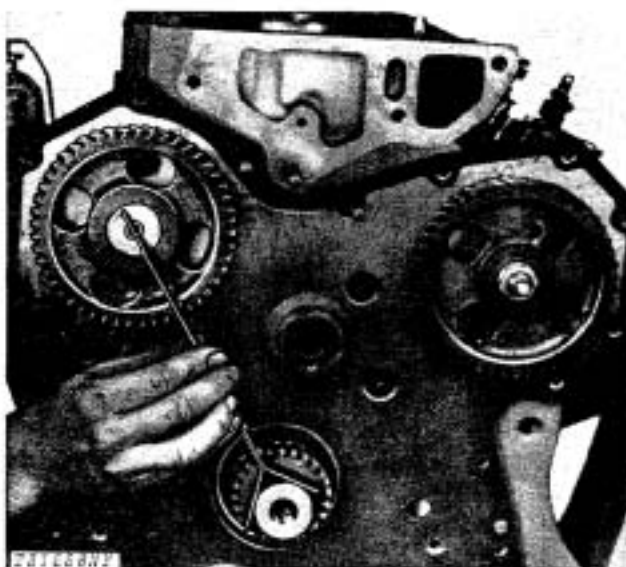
Timing the Camshaft Gear with JD-254 Tool
